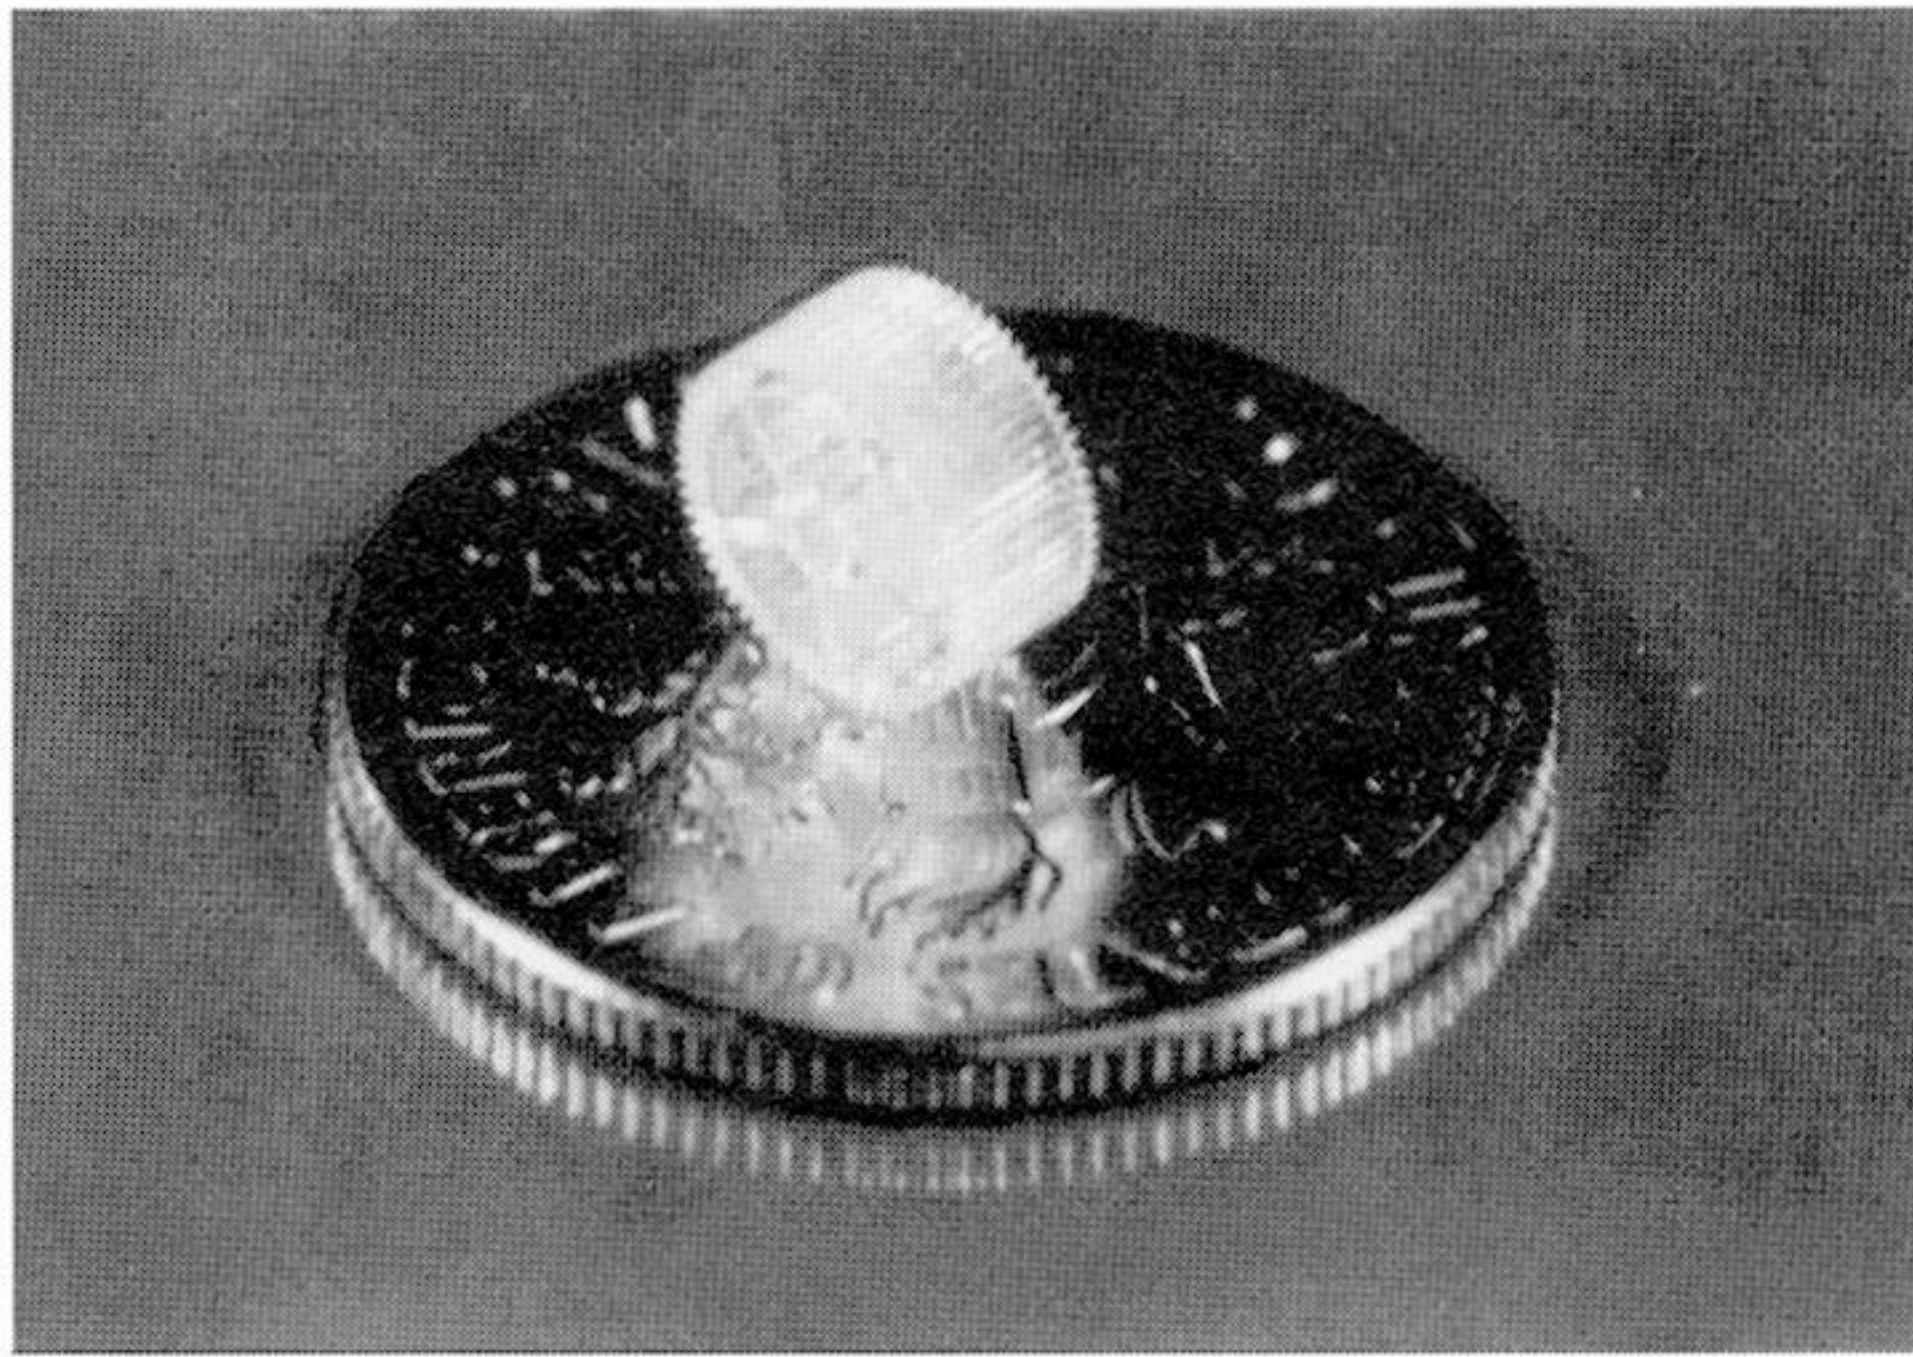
3 mm thick PMMA gear fabricated from free-standing PMMA sheet on top a dime.
